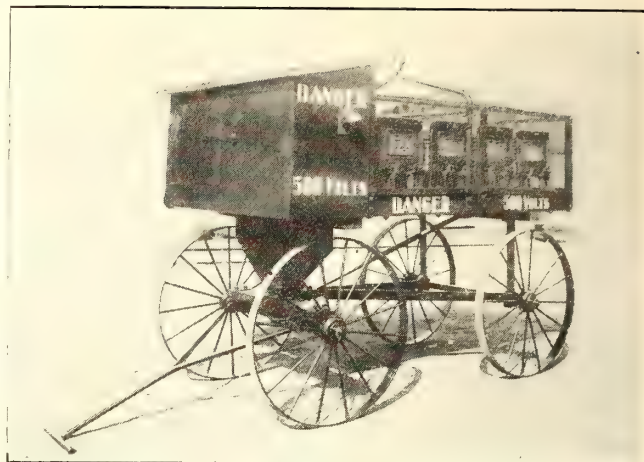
PORTABLE RHEOSTAT OUTFIT FOR ELECTRIC ARC WELDING OF RAIL JOINTS
